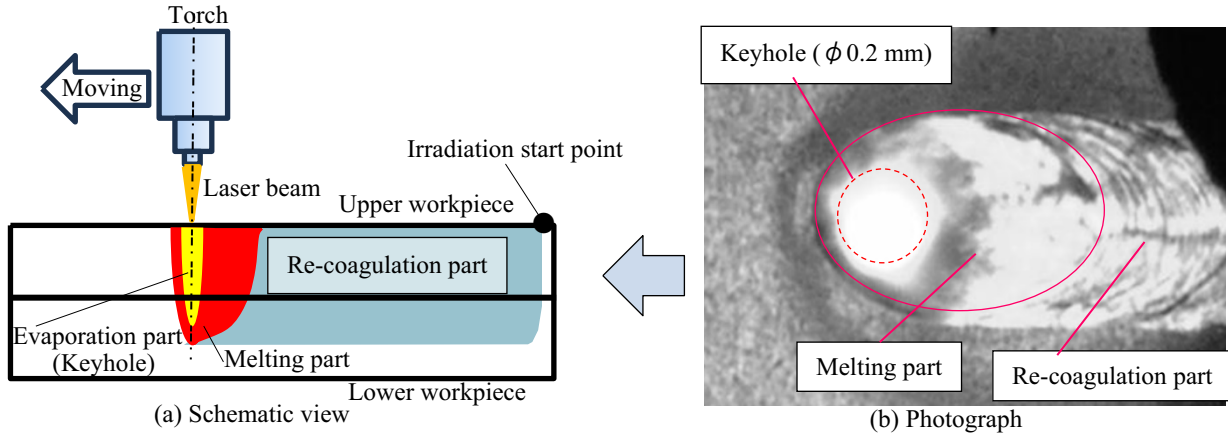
Schematic view and photograph of the keyhole type welding.
